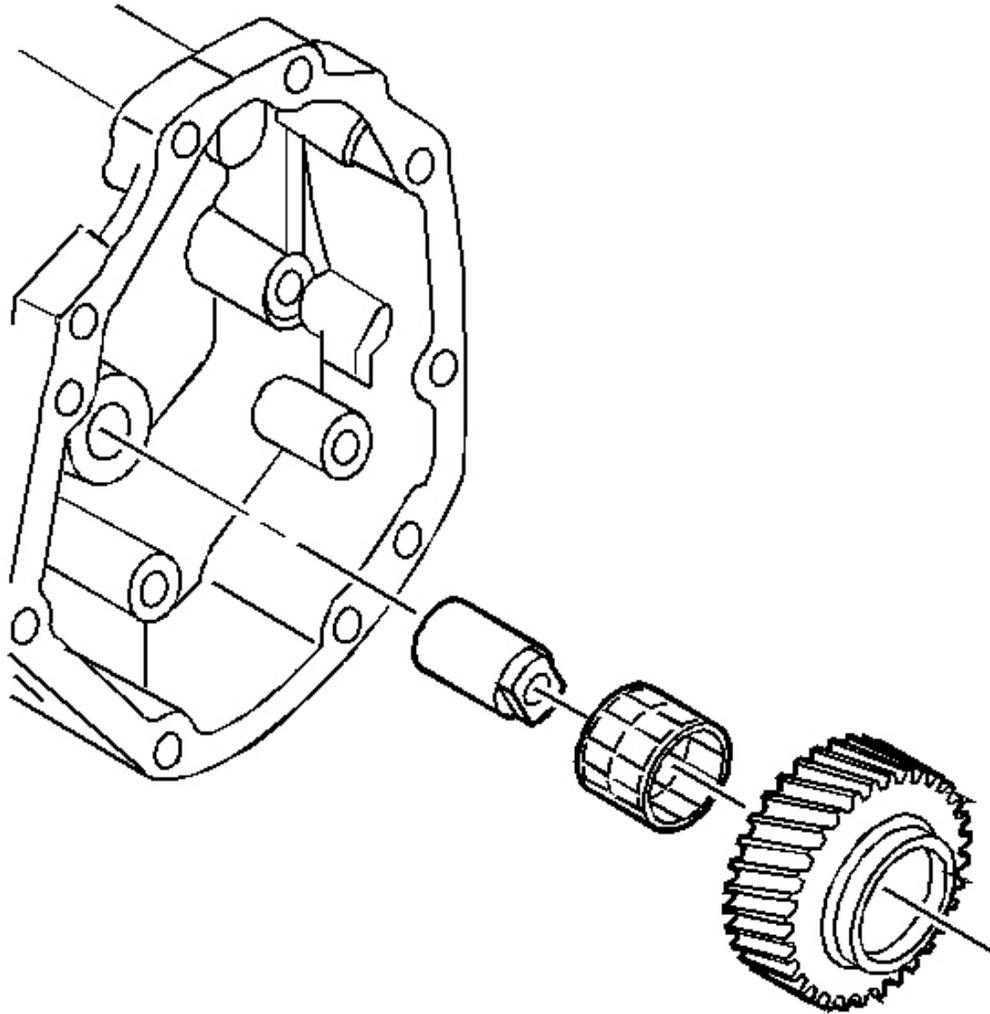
Identifying Reverse Idler Shaft, Roller Bearing & Reverse Idler Gear
